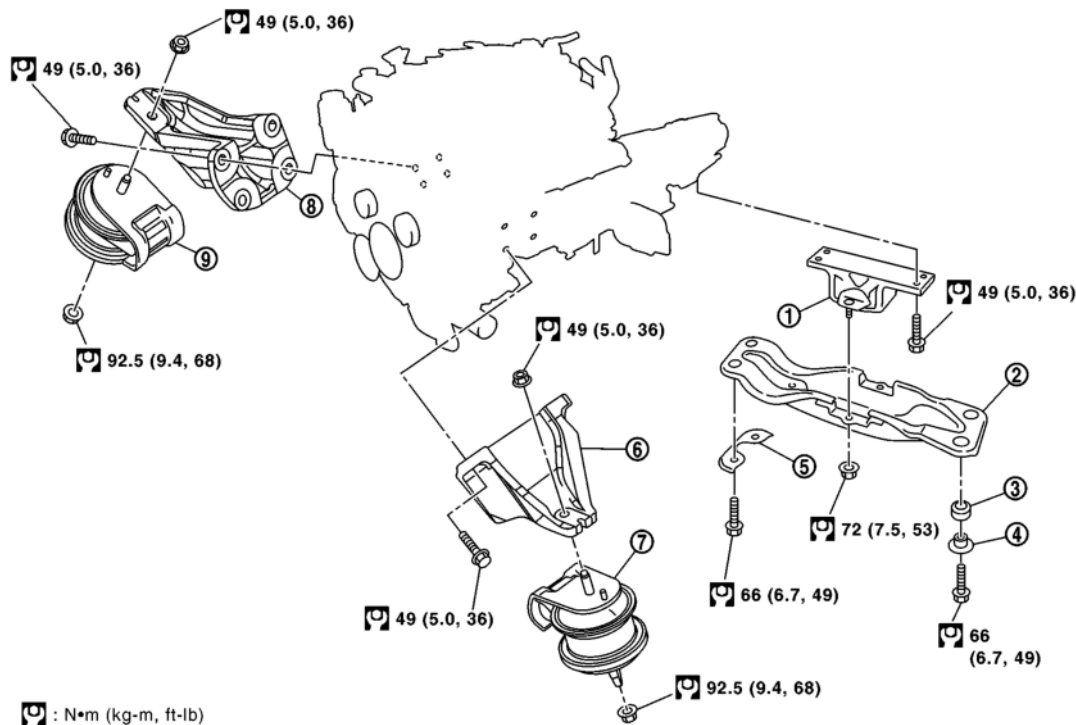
Identifying Engine Assembly Components With Torque Specifications
